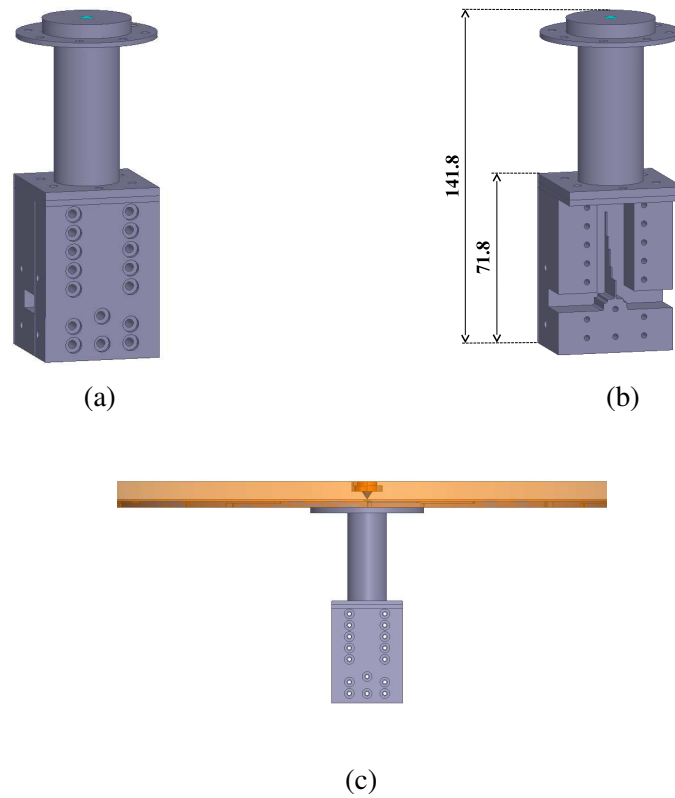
Assembly of the air-filled large septum and the taper to the MTS antenna input port. (a) air-filled OMT and matching pieces. (b) front piece of the septum removed and (c) OMT and MTS assembly.
